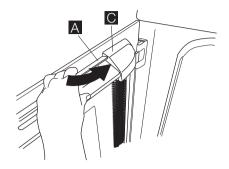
insert the right end of the perforated aluminium plate "A" into the recess in the retainer "C".
